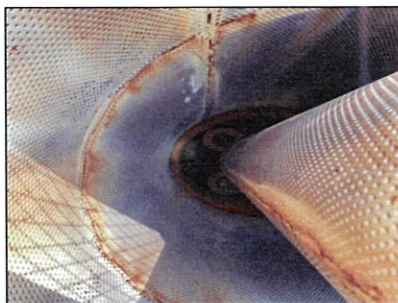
Visual inspection and remove scale on IP steam drum silencer
